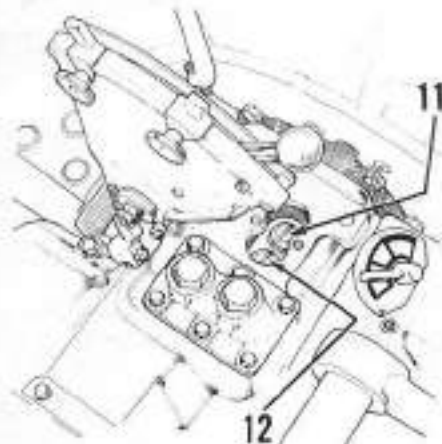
To clean nylon screen in by-pass valve plunger, remove plug (11) and withdraw the spring and by-pass plunger assembly. For exploded view of by-pass plunger, refer to items 5, 6, 7 and 8 in Fig. 298. Hold valve plunger retaining plug is (12).
